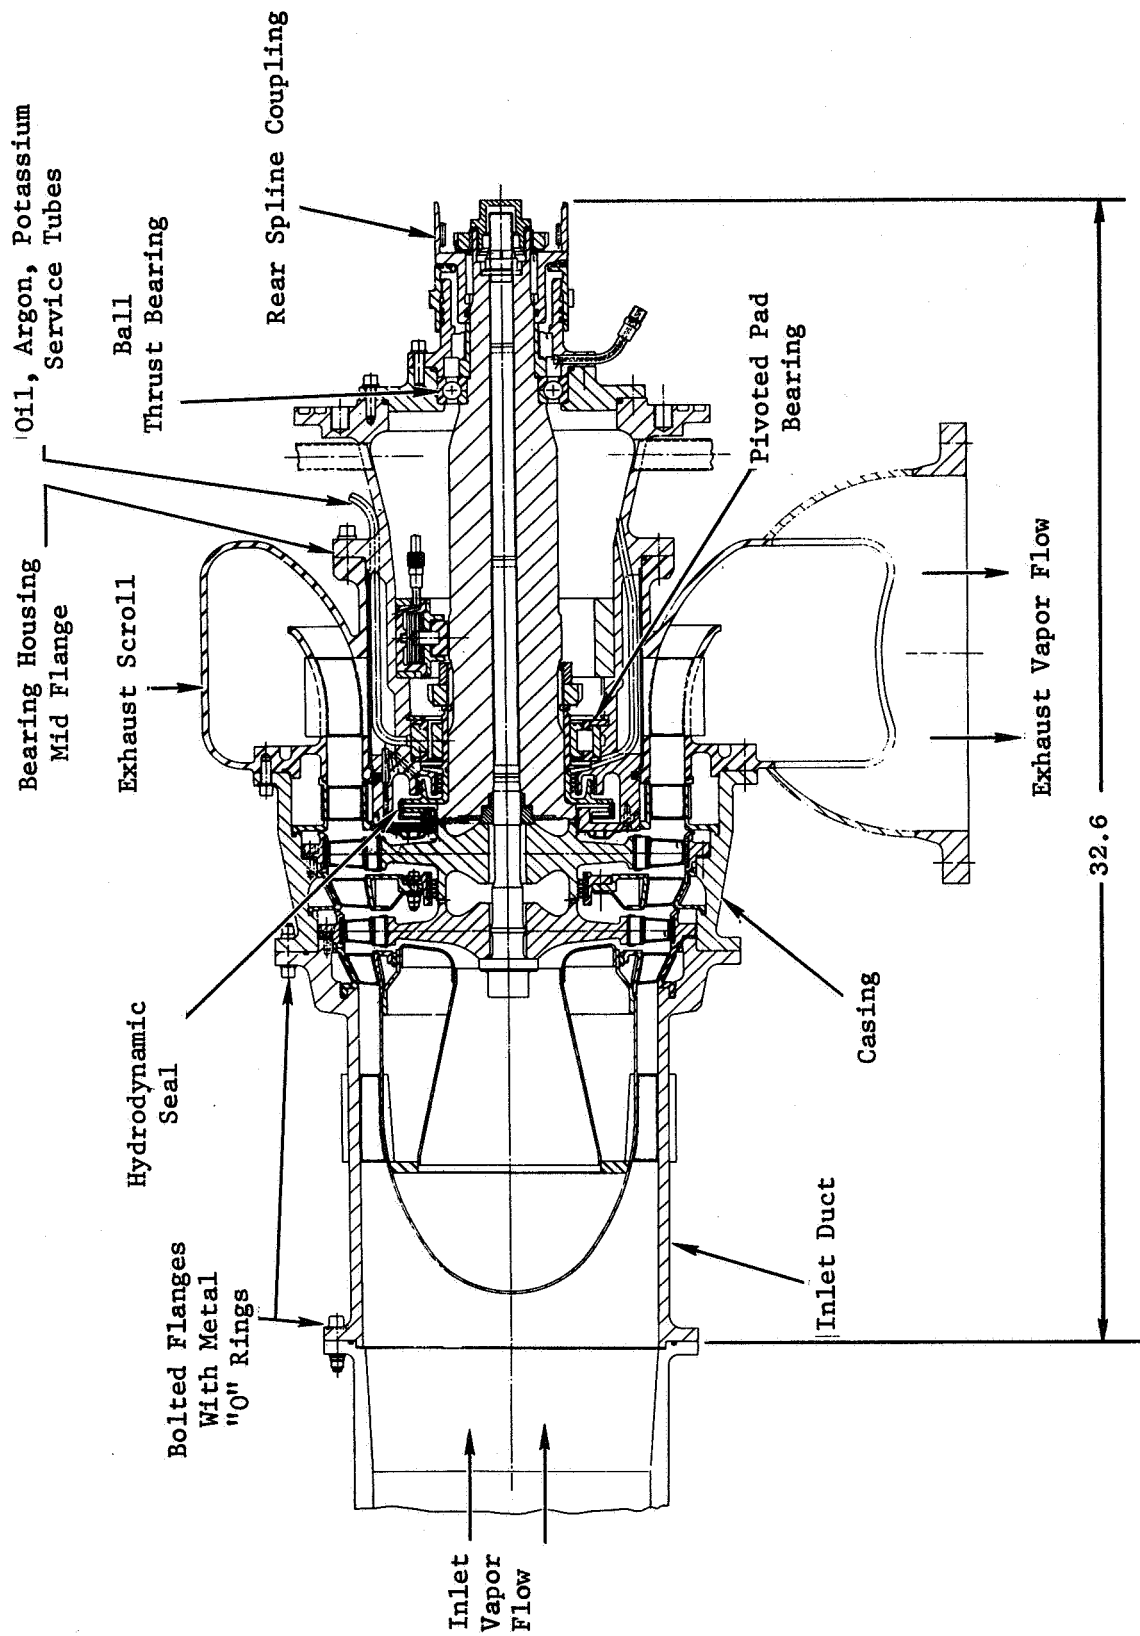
Cross Sectional View of Potassium Test Turbine Showing the Original Design.
